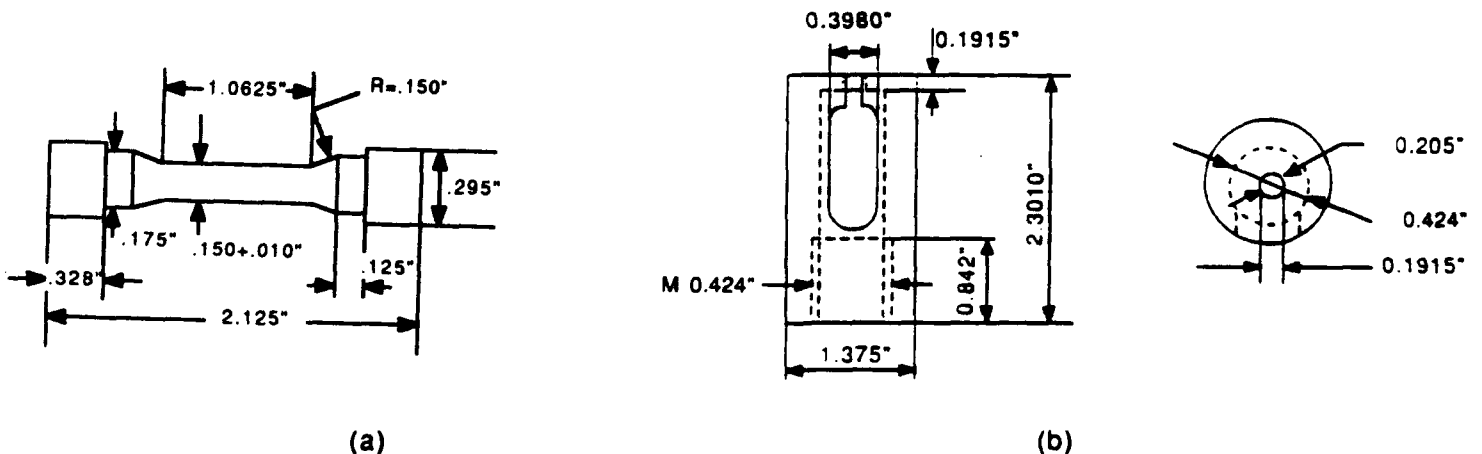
Dimensions of a specimen (a) and its grip device (b)
